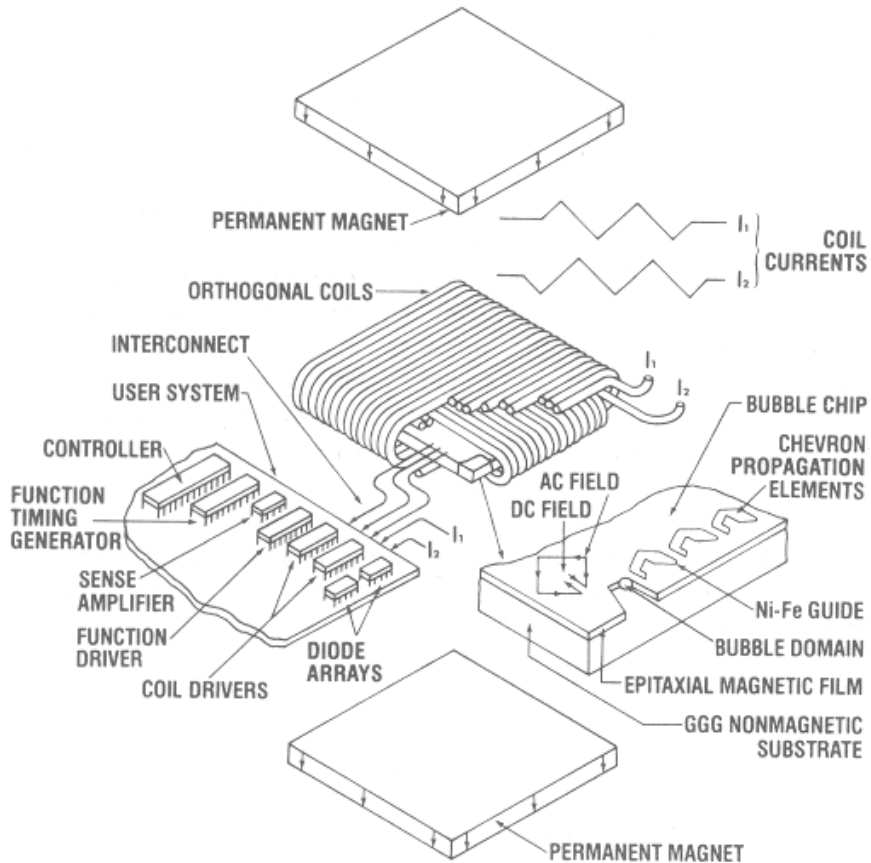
MAGNETIC-BUBBLE MEMORY (EXPLODED VIEW)
